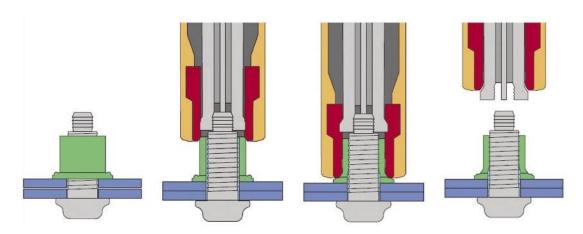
Huckbolt: Cut view of the collar to the grooves - In Windpowerengineering
